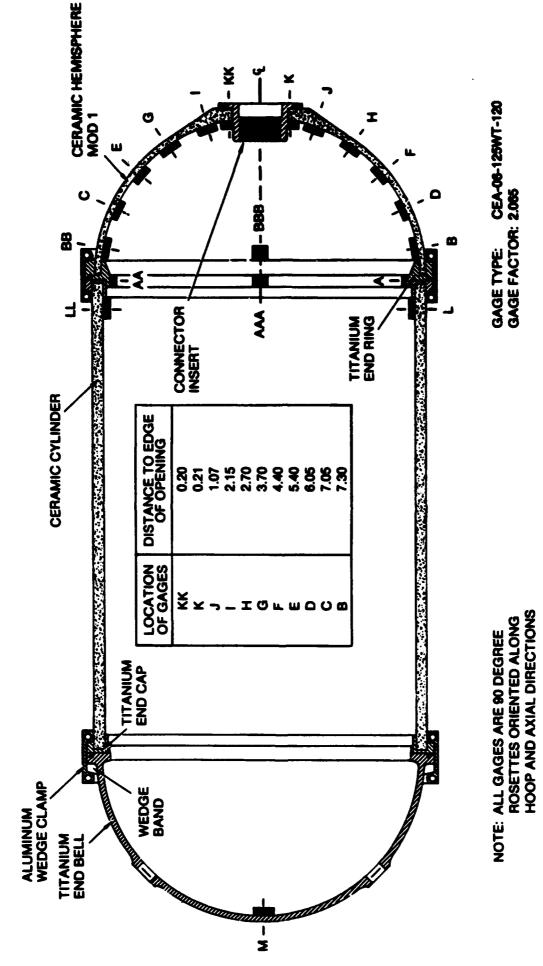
Location of strain gages on ceramic housing test assembly 2A.
